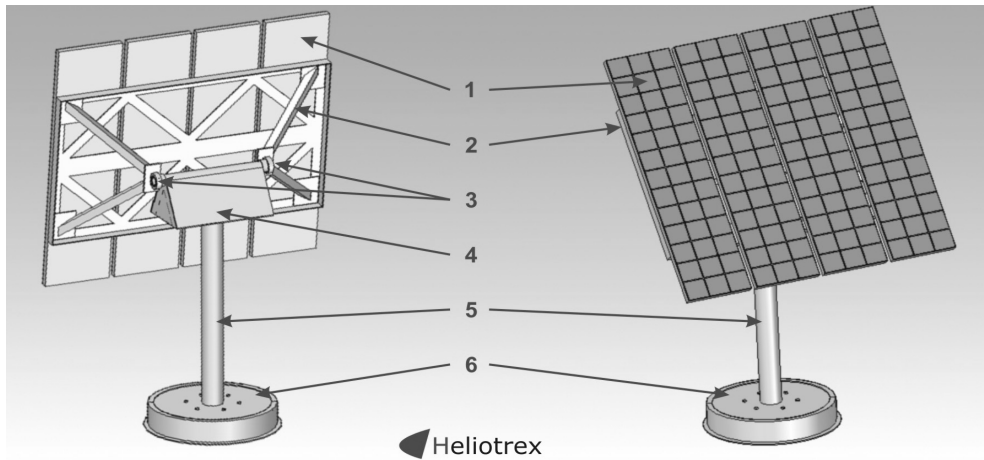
Structure of the tracker: 1 - solar modules, 2 - framework with bracing, 3 - bearings, 4 - housing for the electronics and the tilting drive gear, 5 - shaft, 6 - housing for the rotating drive gear
